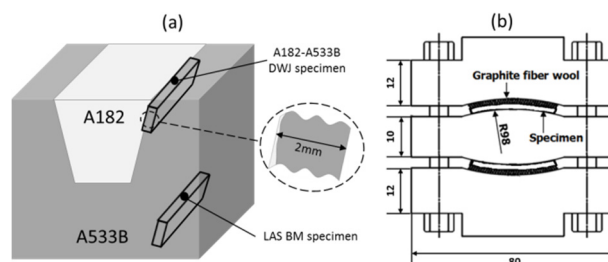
(a) The sampling location of specimens, and (b) the configuration of test fixtures for the CBB test.
